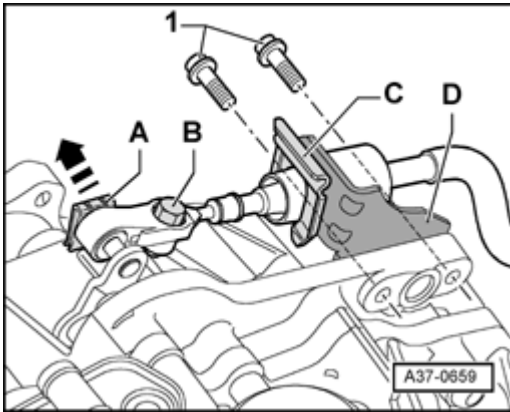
Removing Bolts For Support Bracket, Pulling Off Retaining Clip Upward & Disconnecting Selector Lever Cable From Transmission
